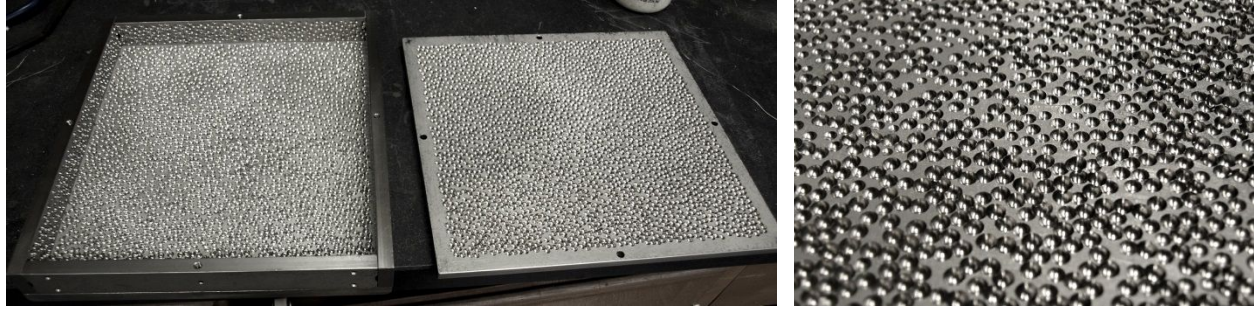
The stainless steel mold used to make samples L1 and L2, with its top (left). The side walls shown are those used for sample L1; those for L2 are taller. A close-up of the mold surface is shown on the right.
